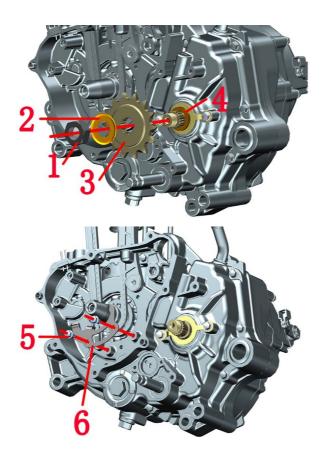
LE	EFT CRANKCASE	ZT158MJ Left crankshaft box assembly-1	CHK	(0)
